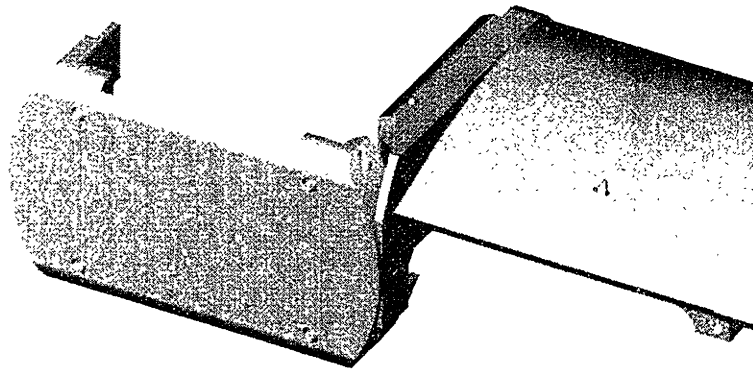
(B): VIEW OF PIVOT MECHANISM (FROM OUTSIDE OF WING CAVITY)
